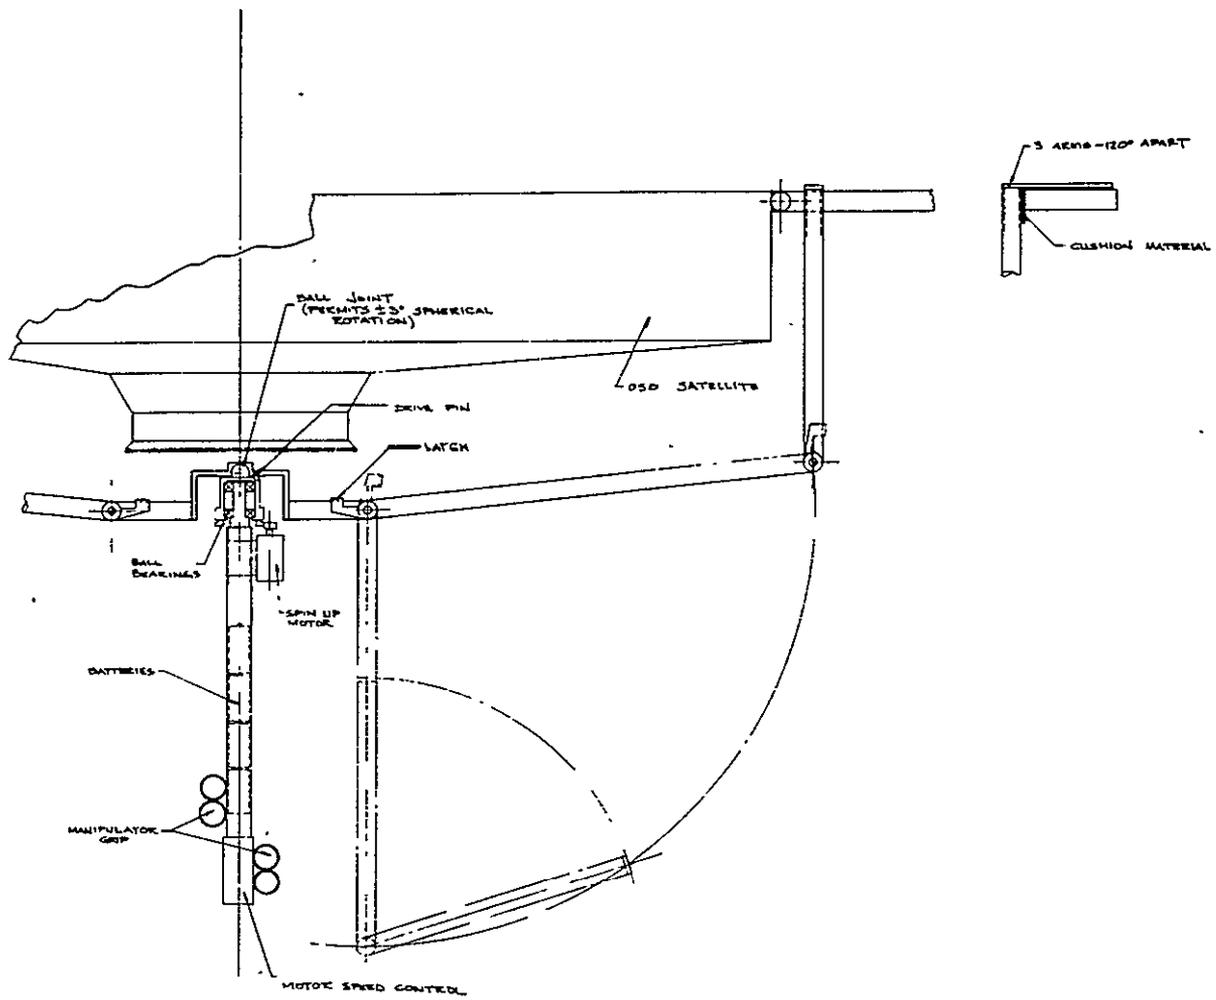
OSO-D Despin Fixture Rotating Hook Arms
